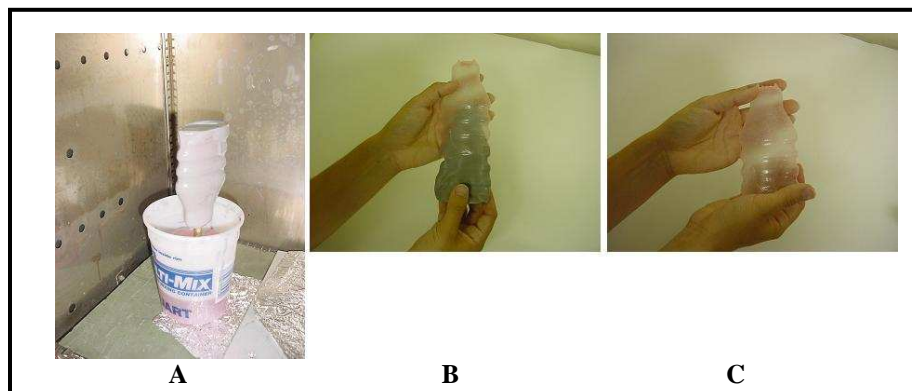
A) Melting of Wax B) Removal of Rubber Liner C) Final Bottle
